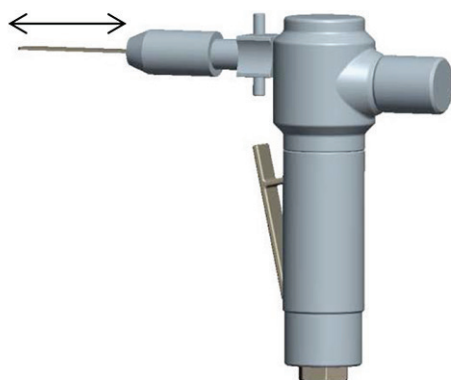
Angle reciprocating polishing/filing with tool holder without moving parts — Designed for two handed operation — Alternative design
